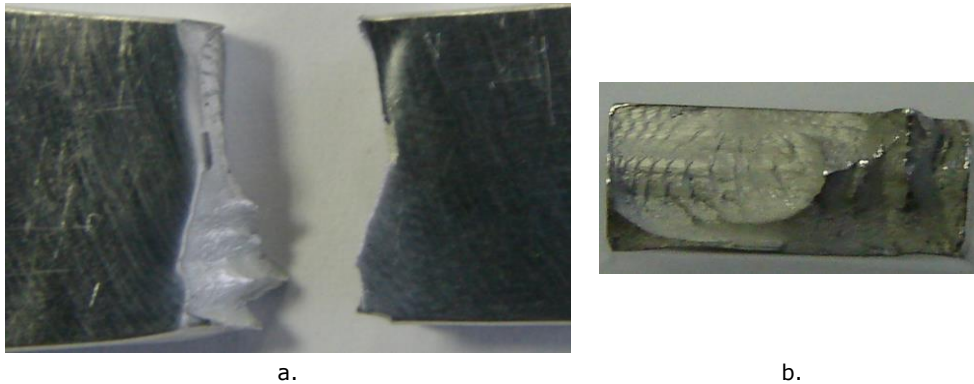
35. a) AA6082-T6 FS welded fatigue tested specimen, fracture location; b) AA6082-T6 FS welded specimen, fracture surface
